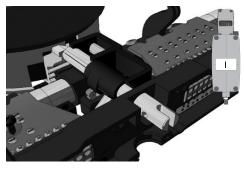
Interlocking shaft in unlatched position. ISM is closed.
